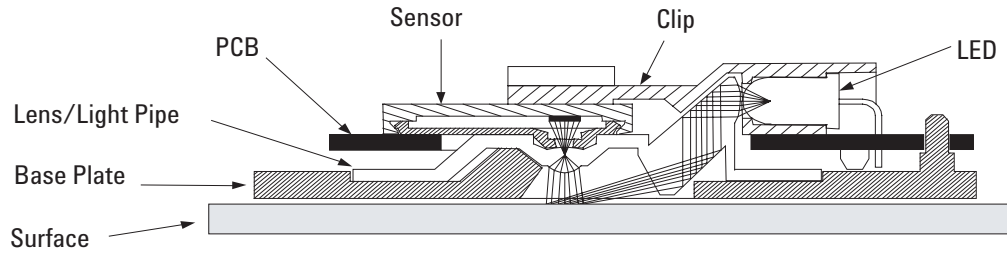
Sectional view of PCB assembly highlighting all optical mouse components (optical mouse sensor, clip, lens, LED, PCB, and base plate).
